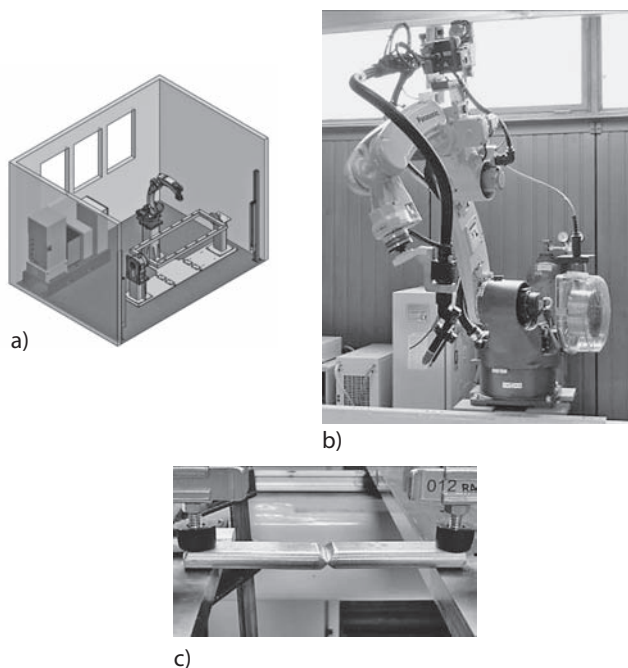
Test station for TIG welding processes: a) general view, b) welding robot, c) method of material fastening
